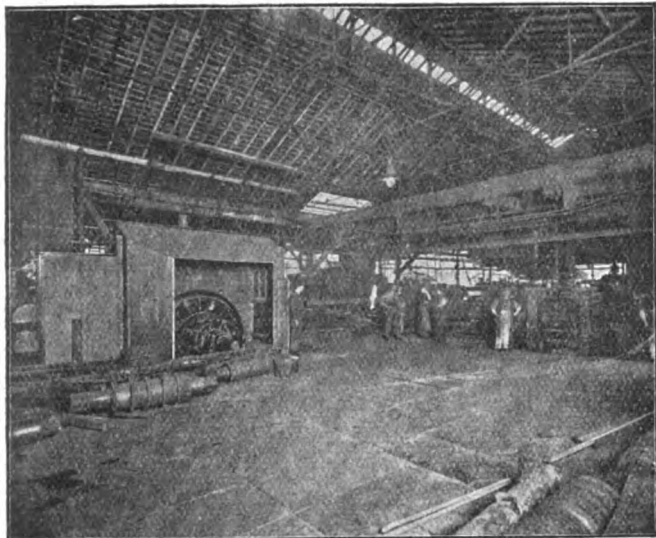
300 H.P. MOTOR DRIVING ROLLING MILL.
